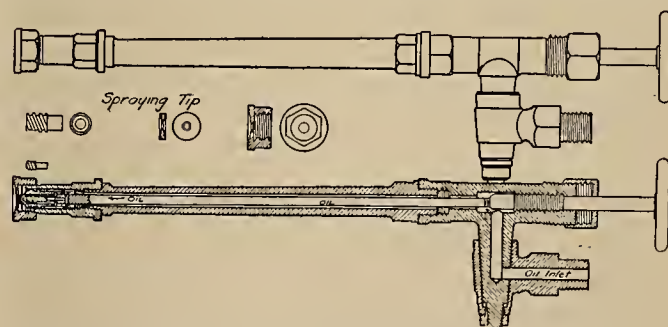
Mechanical Burner Used in Baku Oil Fields.
